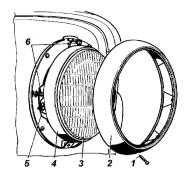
Headlamp: 1,5 -screws; 2 -garnish molding; 3 -sealed beam unit; 4 -inner molding; 6 -adjusting screws
